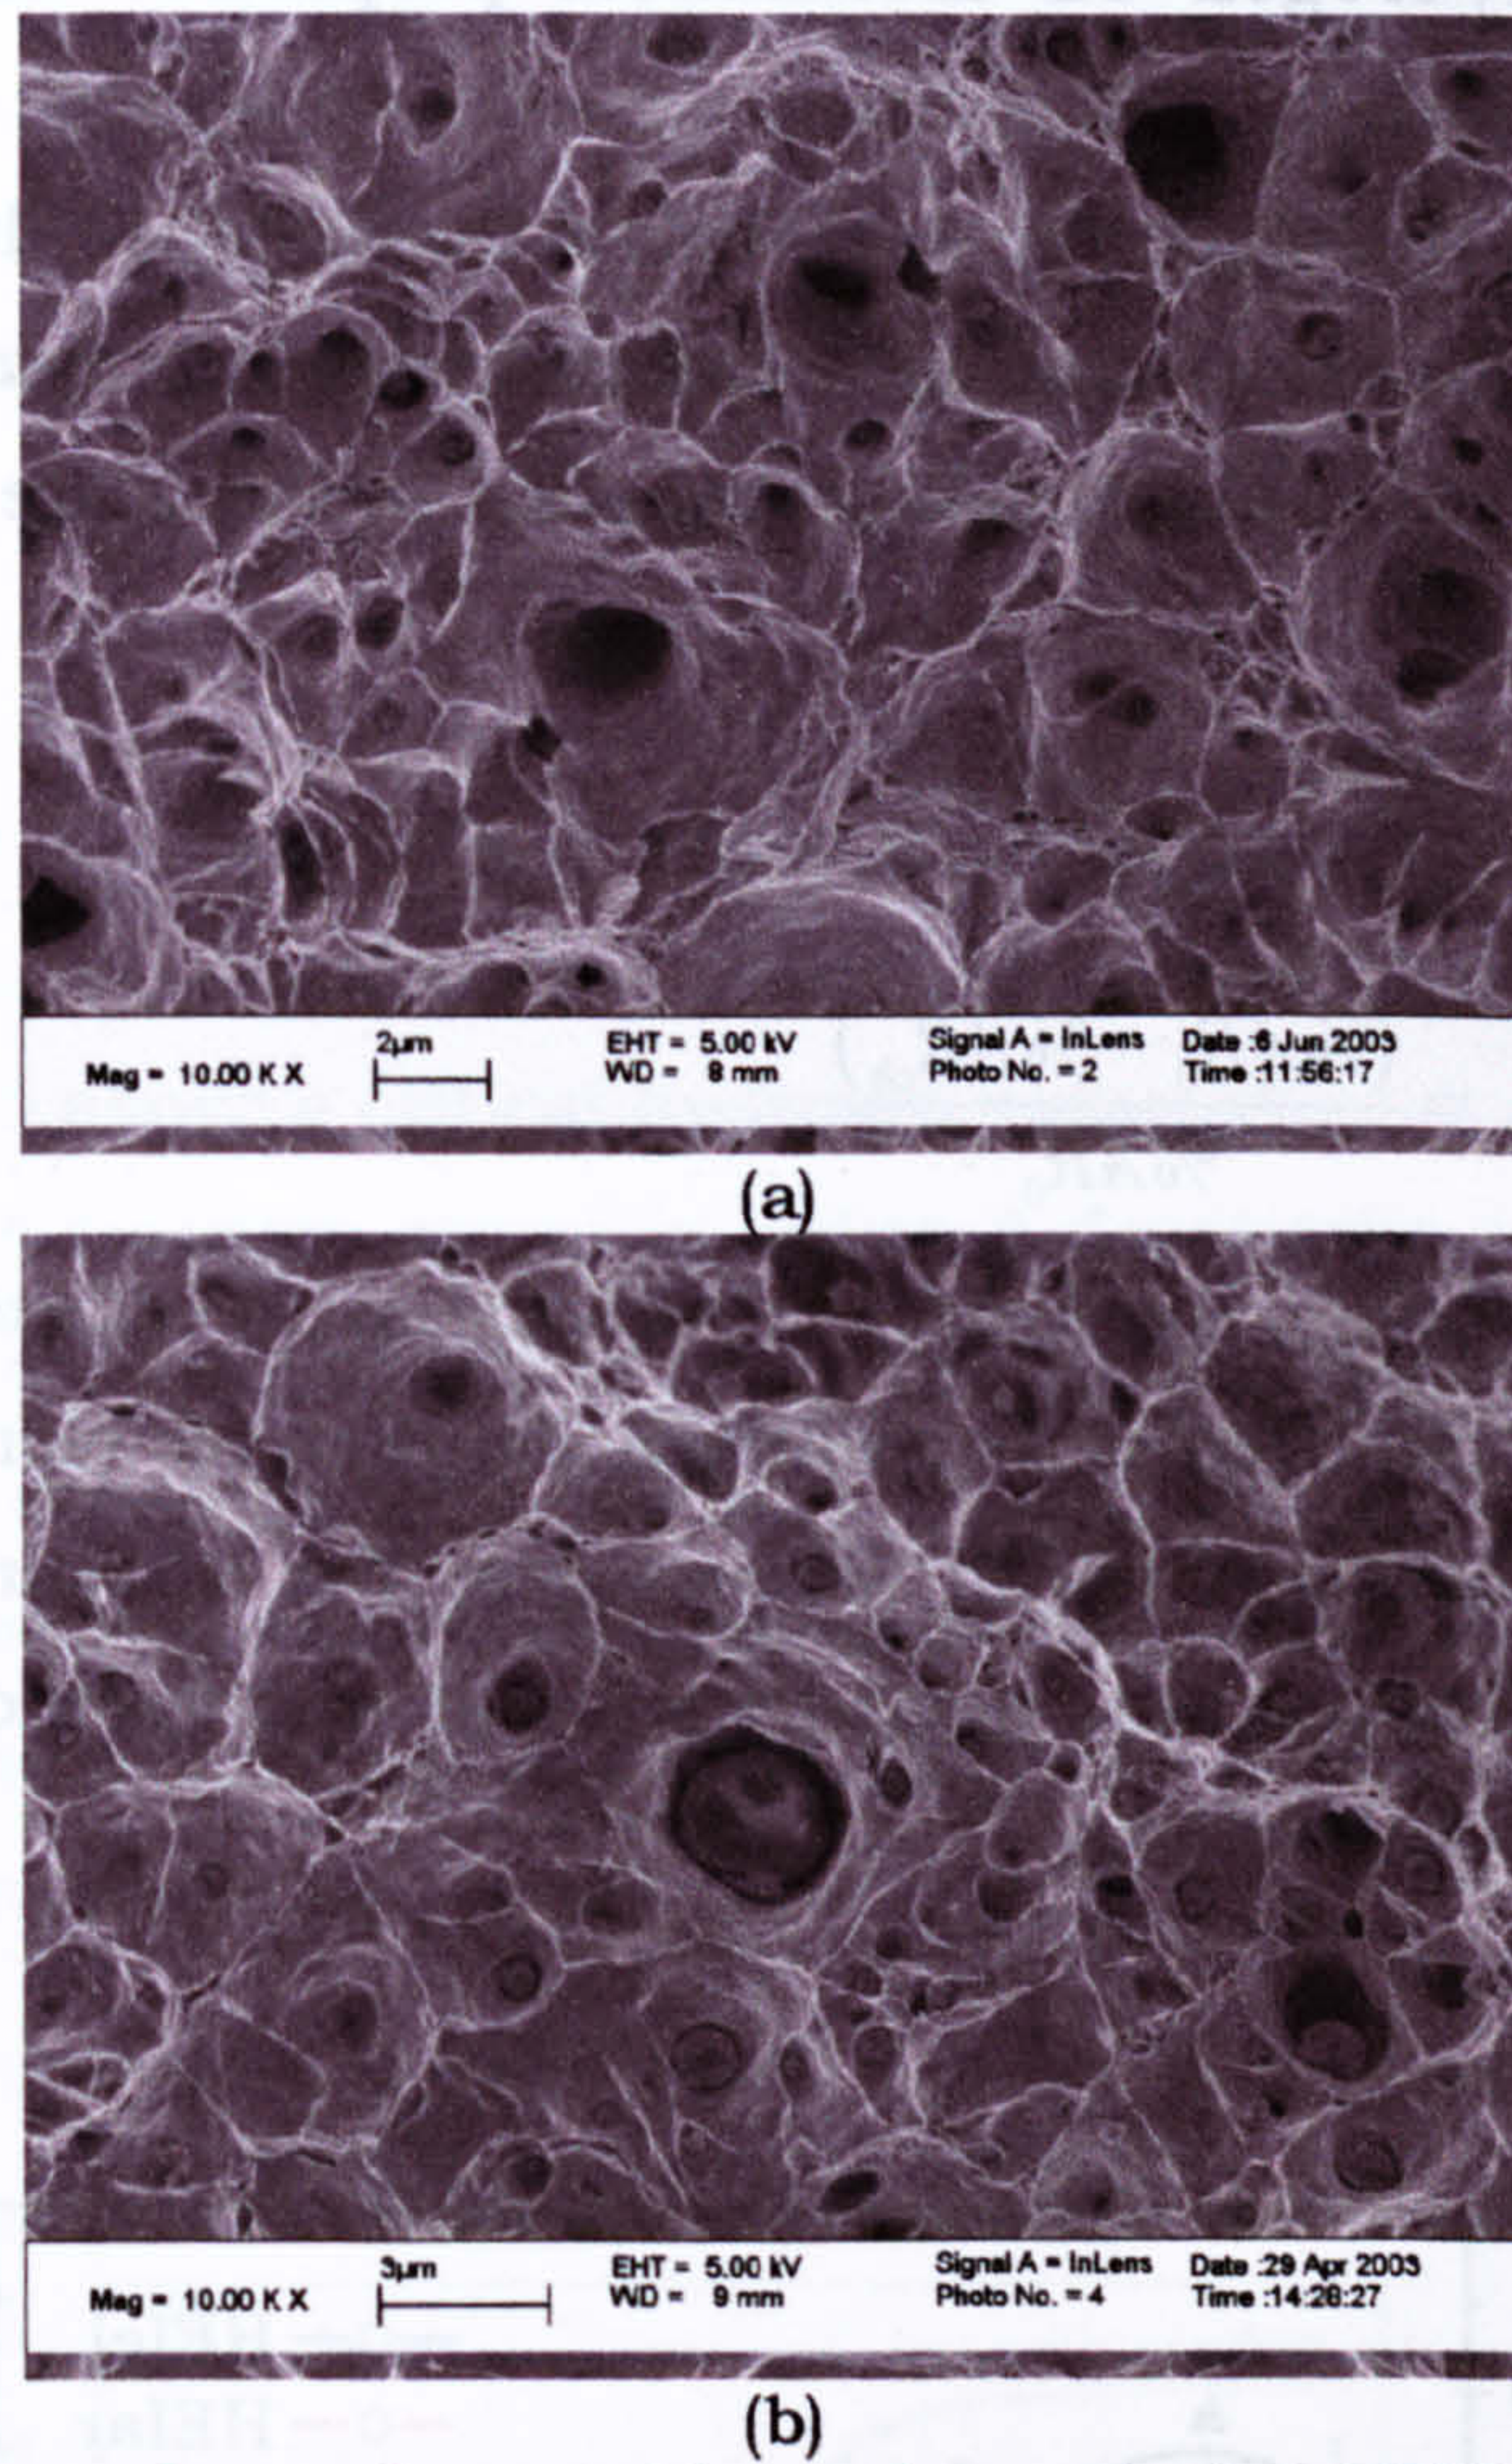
Fracture surfaces of two weld metals presenting MVC fracture: (a) CWX201 and (b) CWX331. These weld metals do not present PF(G), and the smooth flat regions are absent (compare with 8.2).
